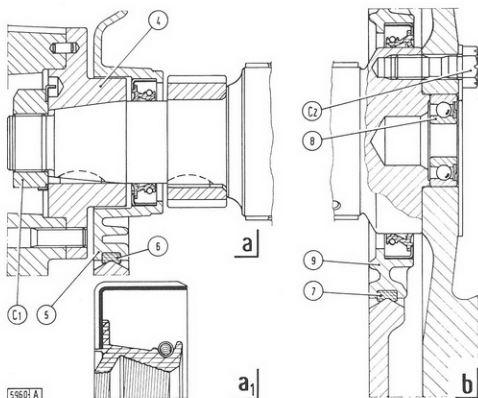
Sectional Views of Crankshaft Front and Rear Seals (a and b respectively)
